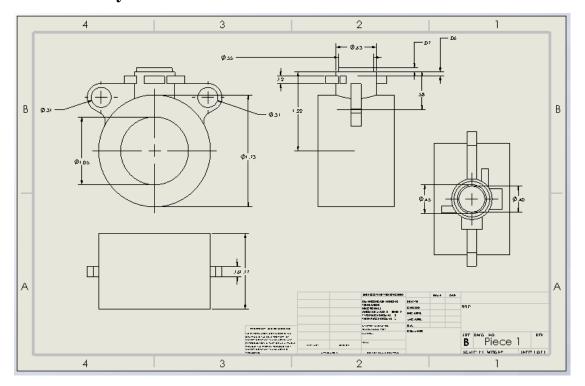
2-Dimensional Sketch of Valve Body
